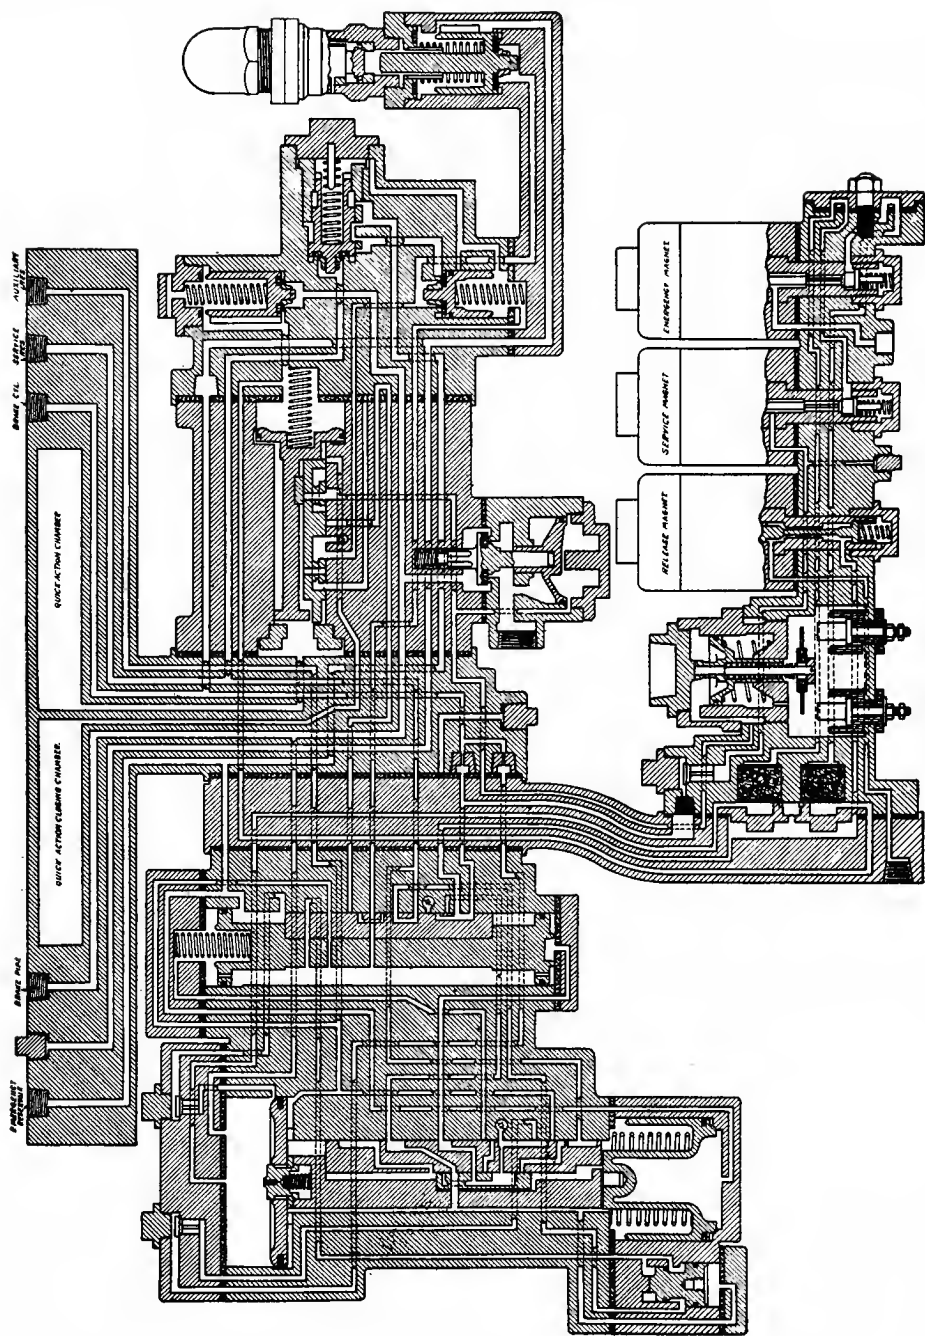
UNIVERSAL VALVE, UC EQUIPMENT
